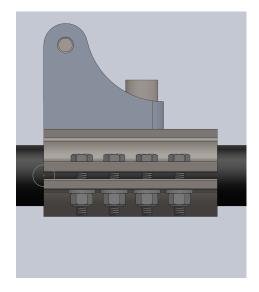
SIDE PROFILE OF ENTIRE SHAFT COUPLER ASSEMBLY.
